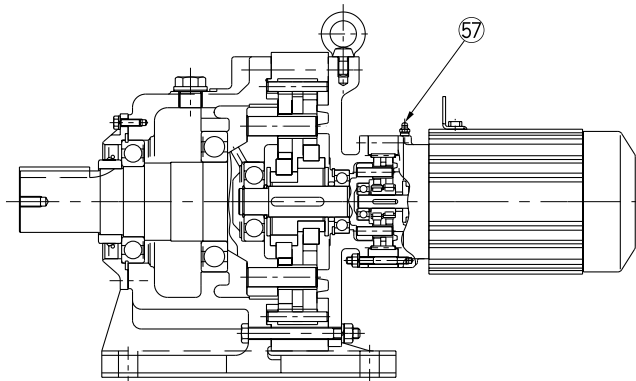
Type CHHM (Horizontal • Gearmotor)
